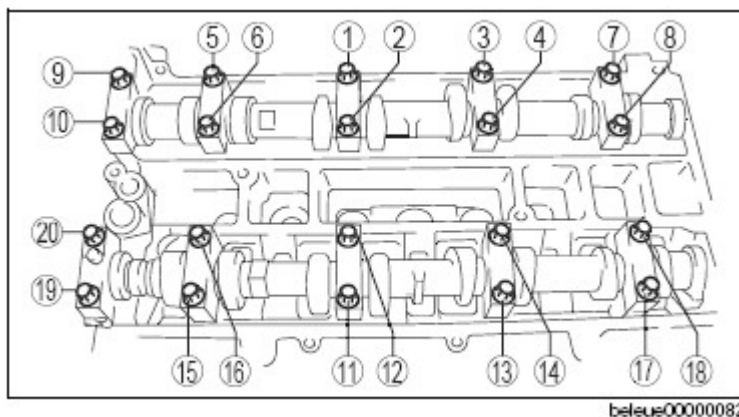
Identifying Camshaft Cap Bolt Tightening OrderCAMSHAFT SPROCKET, VARIABLE VALVE TIMING ACTUATOR ASSEMBLY NOTE
